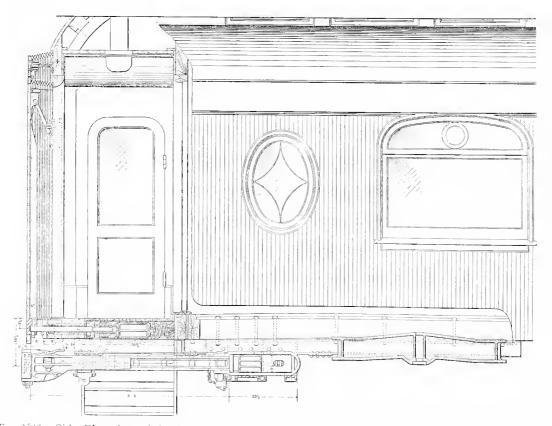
Side Elevation of Gould Wide Vestibule Steel Platform, with Friction Buffer and Draft Gear. Gould Coupler Co.
